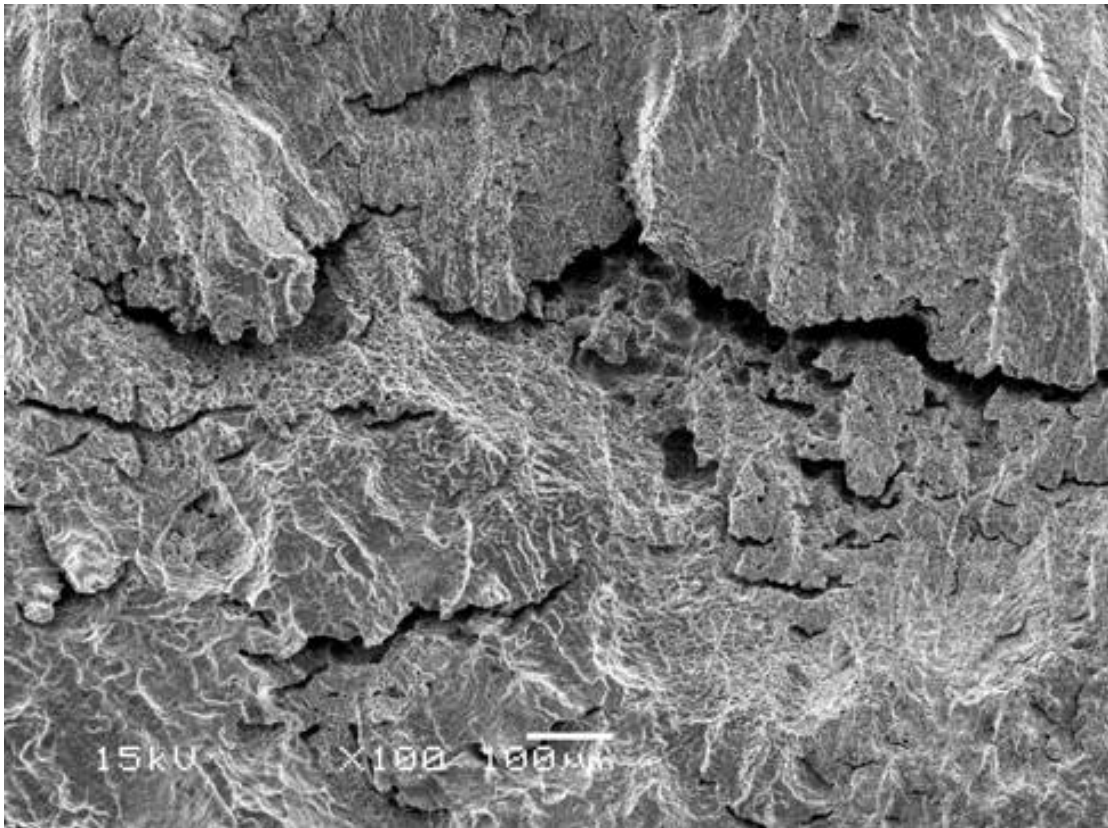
Morphology of the fracture surface of the test specimen tested in water environment at 260°C (initial O₂ = 4, 5 ppm, R.A. = 12, 4%)
